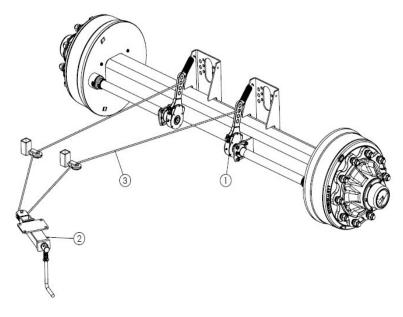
The parking brake 1 - expander lever, 2 - brake tension, 3 - steel cable L=5000 mm
